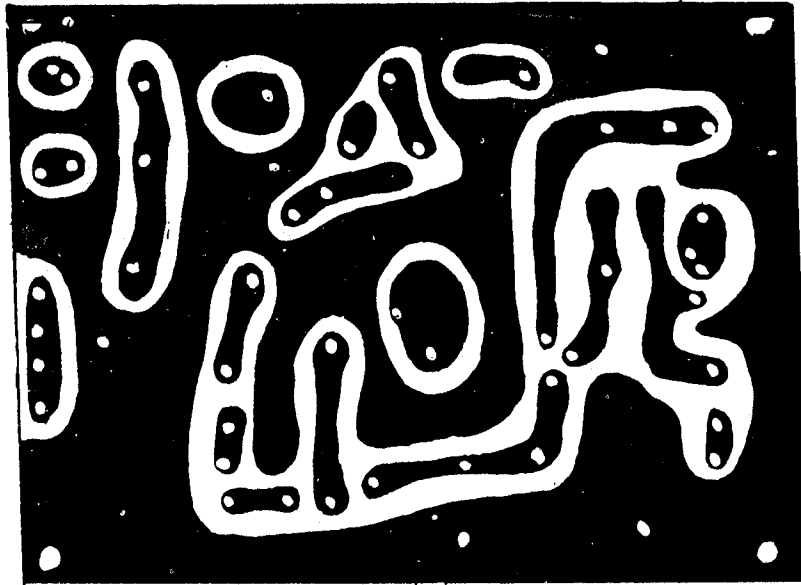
PCB LAYOUT OF R.F AMPLIFIER
